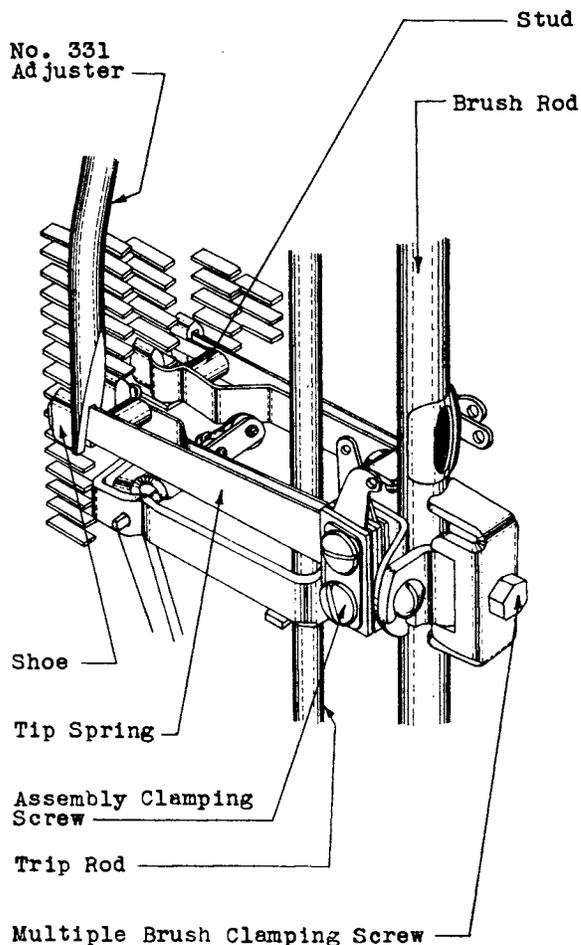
Method of Adjusting for Brush Rod Stud Gap
